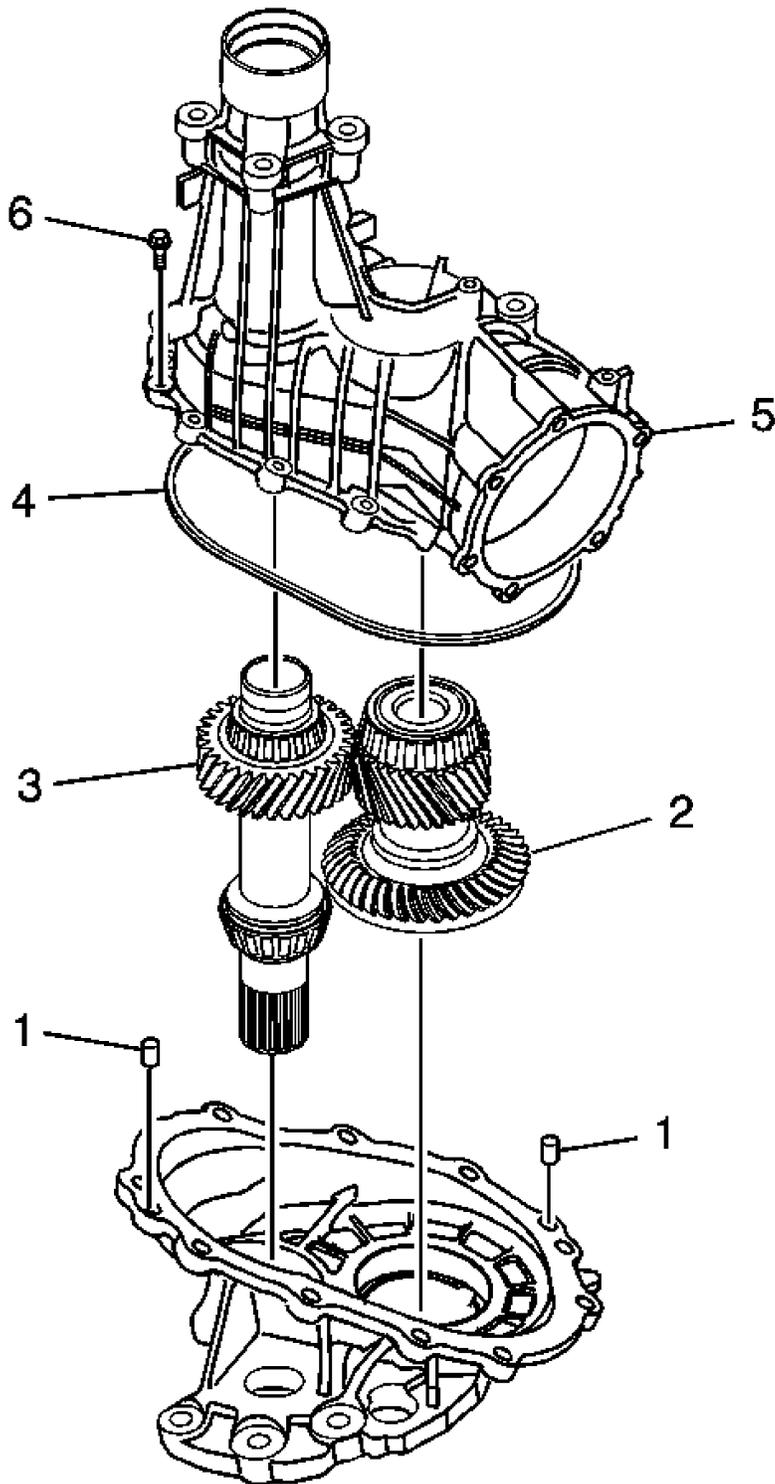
View Of Right Transfer Case, Input Shaft & Output Drive Shaft
